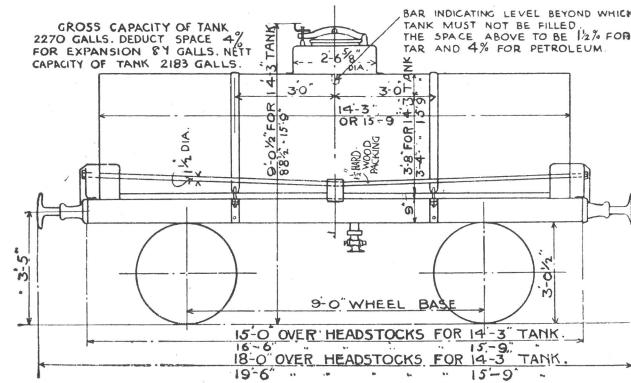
Private Owners' Standard 10- or 12-ton Rectangular Tank Wagon (side elevation)
